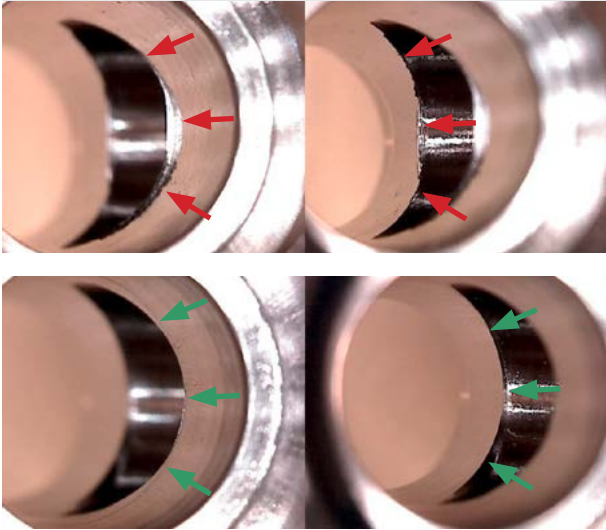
The bore edge is clean and completely free of burrs. Top: Before deburring Bottom: After deburring.
